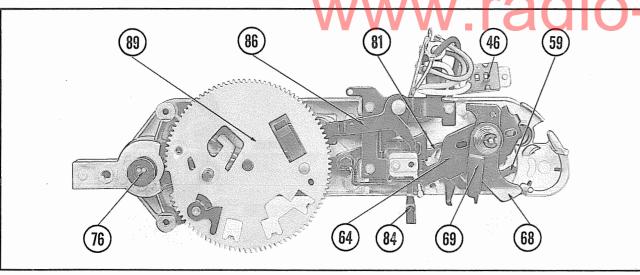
Bottom View Of Cycling Mechanism With Slide Removed.
